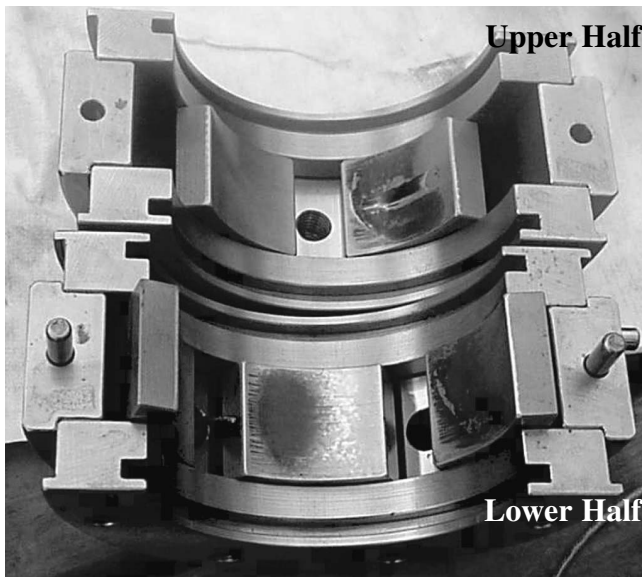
Damaged Bearing Showing Affects of Inadequate Clearance.
